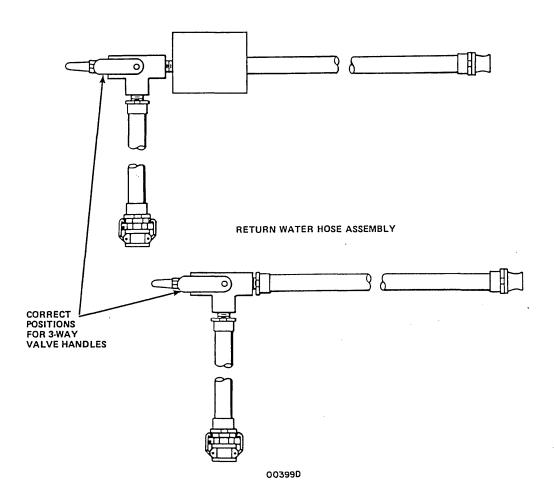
Supply and Return Hose Assemblies 3-Way Valves
